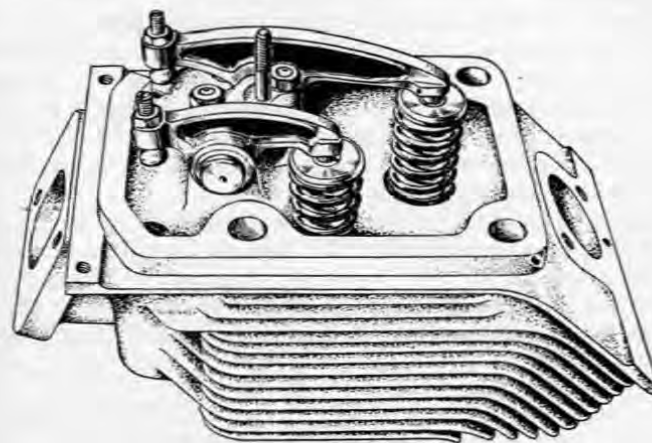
Cylinder head of a compression-ignition engine. Air is directed by the curved fins to give better cooling in the region of the exhaust valve.
